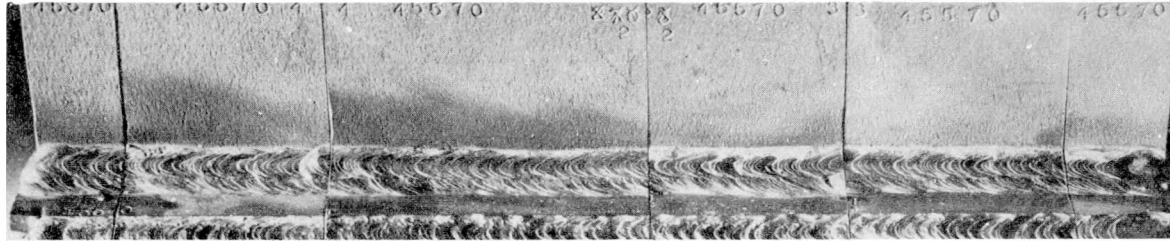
Typical appearance of fissure test specimens performed by Arcos and Crane Company.
